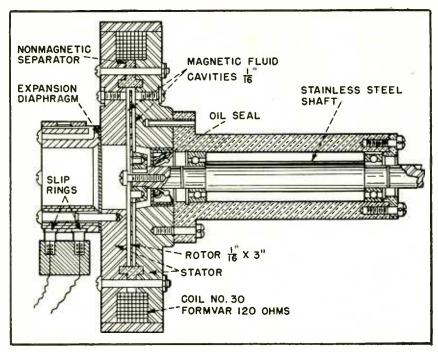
Cross-section of single-disk magnetic fluid clutch. Rotor disk is bolted to end of shaft
